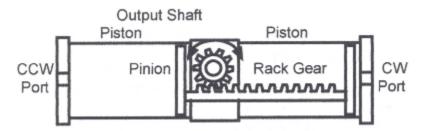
Rack-and-pinion rotary actuator with low-pressure sealed shaft.
